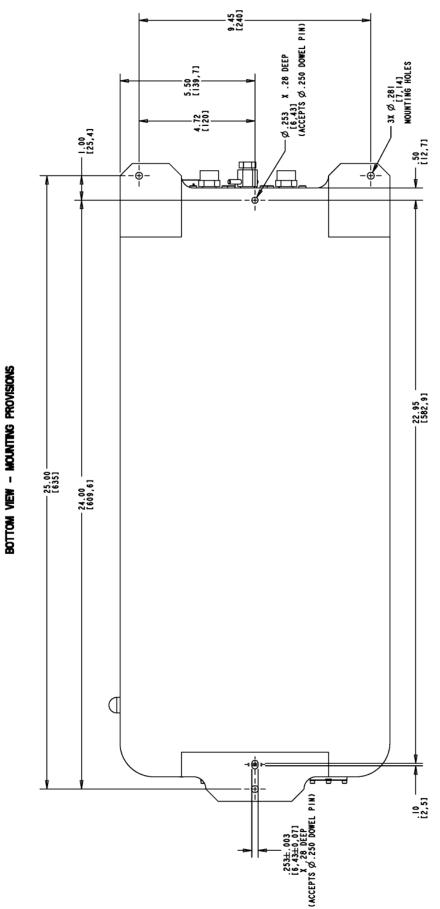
Patara Laser Head Dimensions, Sheet 2
